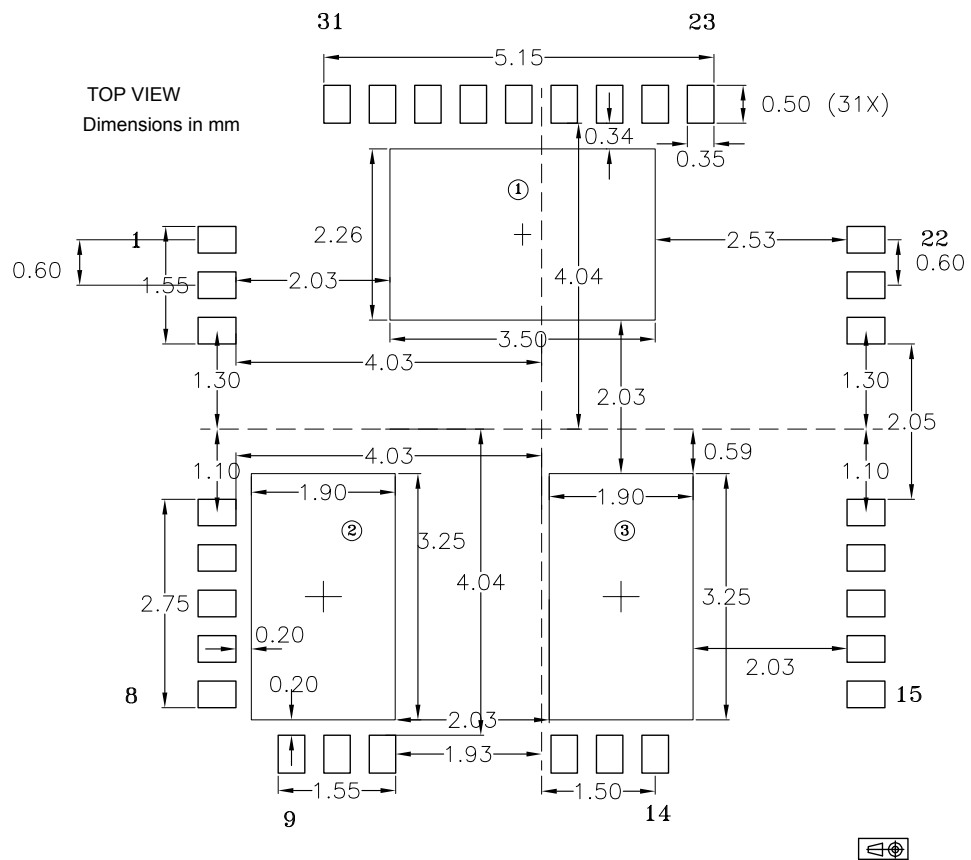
QFN 9 x 9 x 1 mm package dimensions
